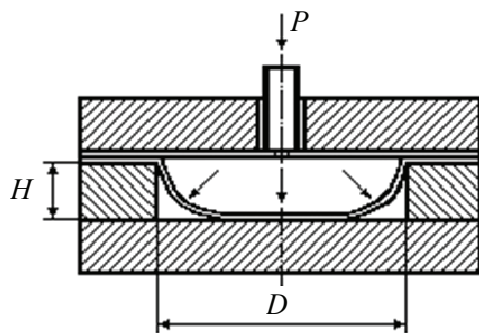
Tooling scheme for SPF sheet blanks in cylindrical matrix: P – forming gas pressure; H – forming depth can be 5, 10, 15 mm; D – diameter of the cylindrical hole in the matrix (30 mm)
